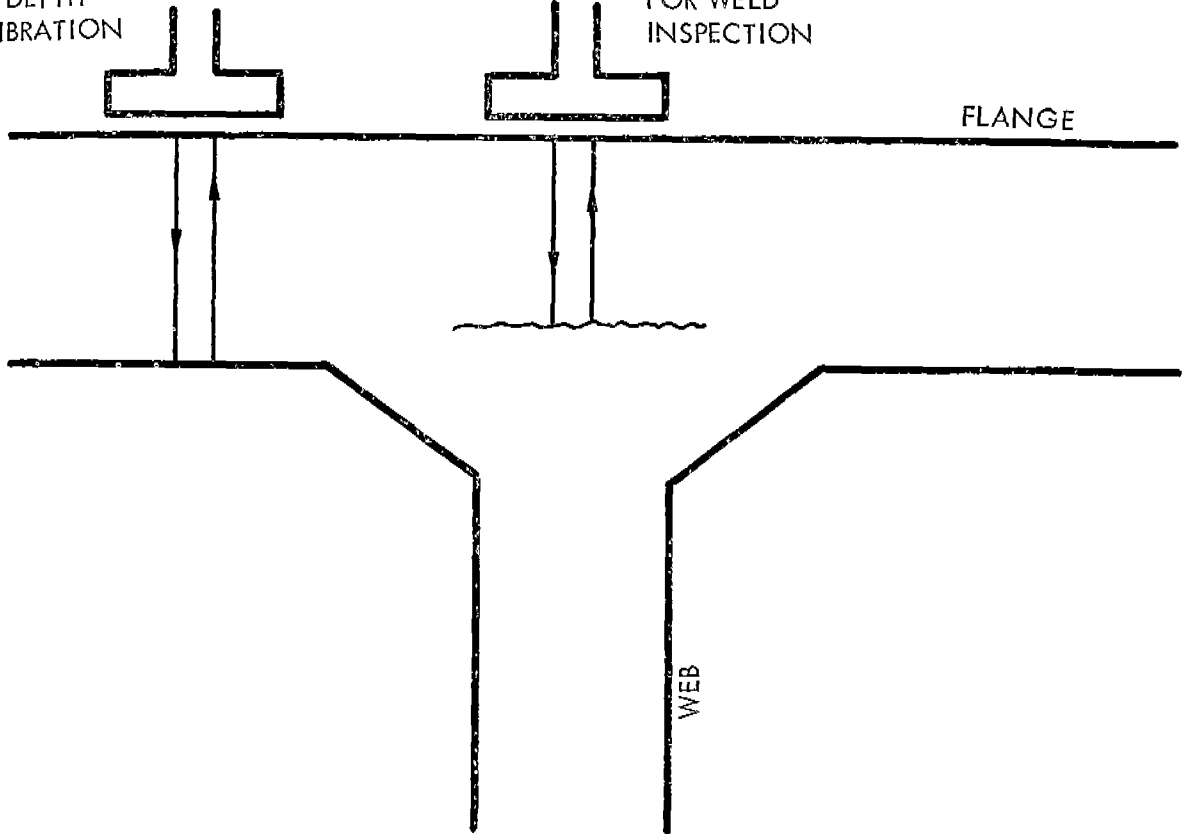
A ULTRASONIC PROCEDURE FOR THE INSPECTION OF T-JOINT WELDS WITH LONGITUDINAL WAVES
